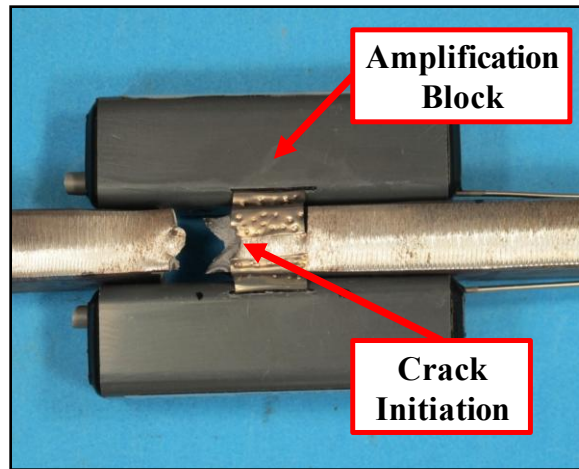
Typical fatigue failure of steel coupon with weldable gage (HBWF-AMP)
